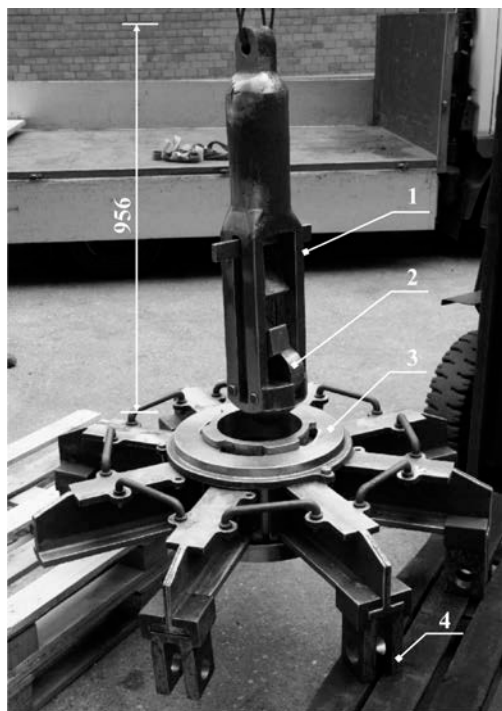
The equipment for the heat treatment of parts of the aircraft chassis [3]: 1 – body with transport hook, 2 – latch, 3 – sling, 4 – clip for fastening of heat treated parts
